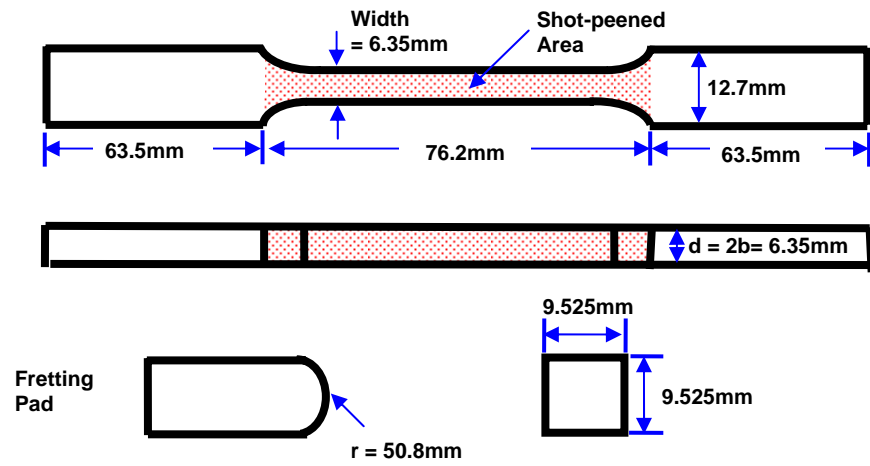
Geometries of fretting fatigue specimens and pads.
